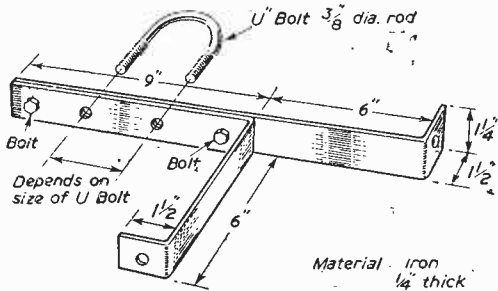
Chimney bracket details. Strip-iron is used here.
